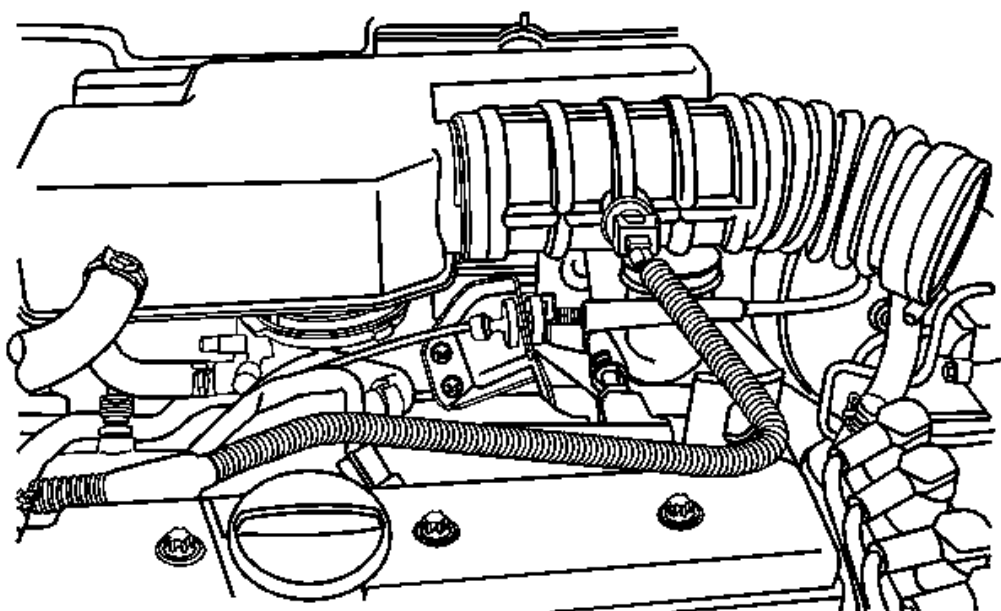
View Of Manifold Air Temperature Sensor And Throttle Body Intake Tube
